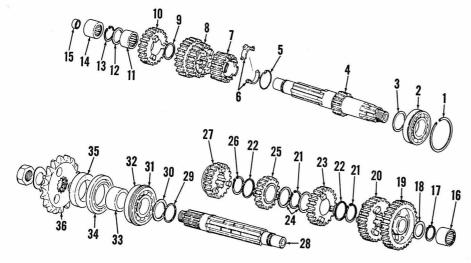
Exploded view of the transmission assembly. Refer to Fig. Y8-21 for view of parts installed in the top half of crankcase.
